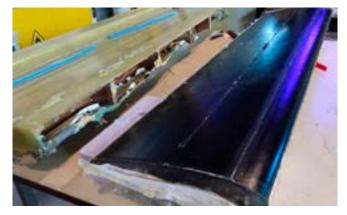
COMPOSITE BLADES MANUFACTURED IN THE LIGHT MOLD.
